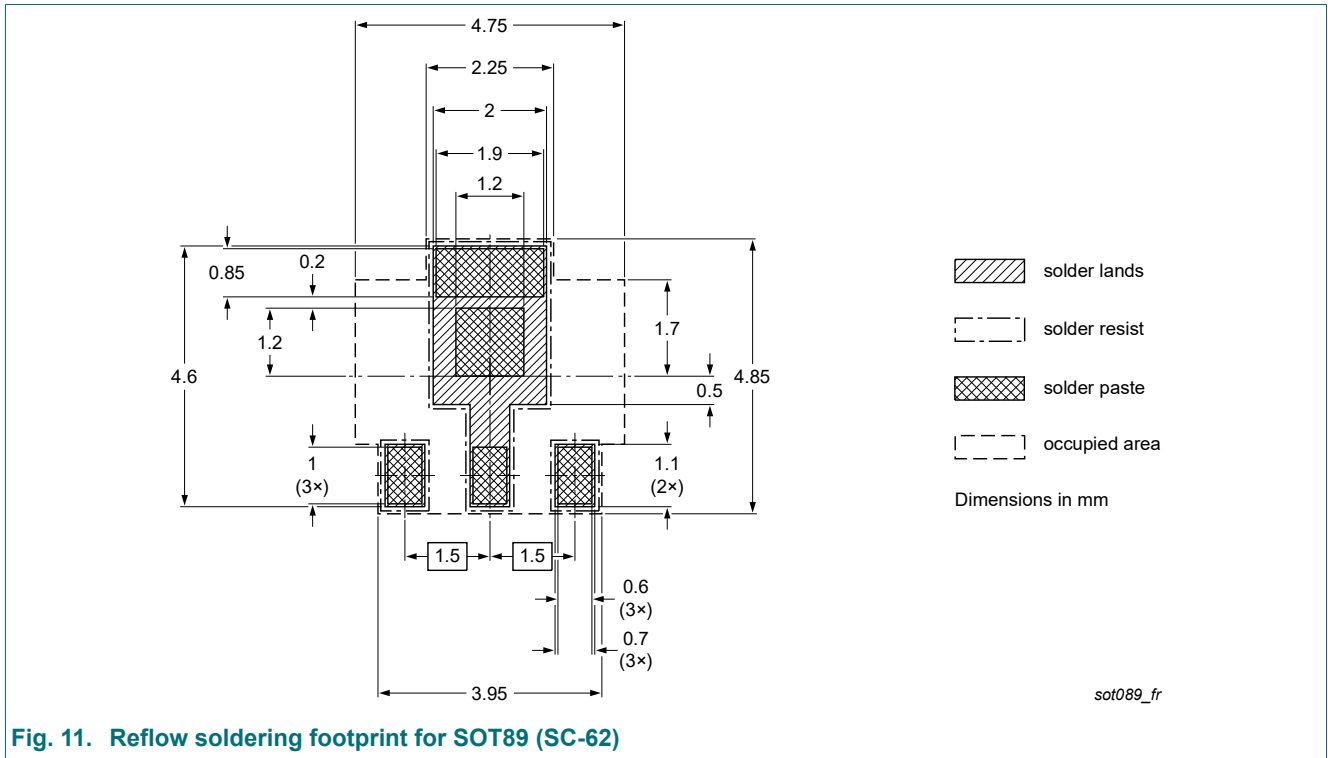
Reflow soldering footprint for SOT89 (SC-62)
